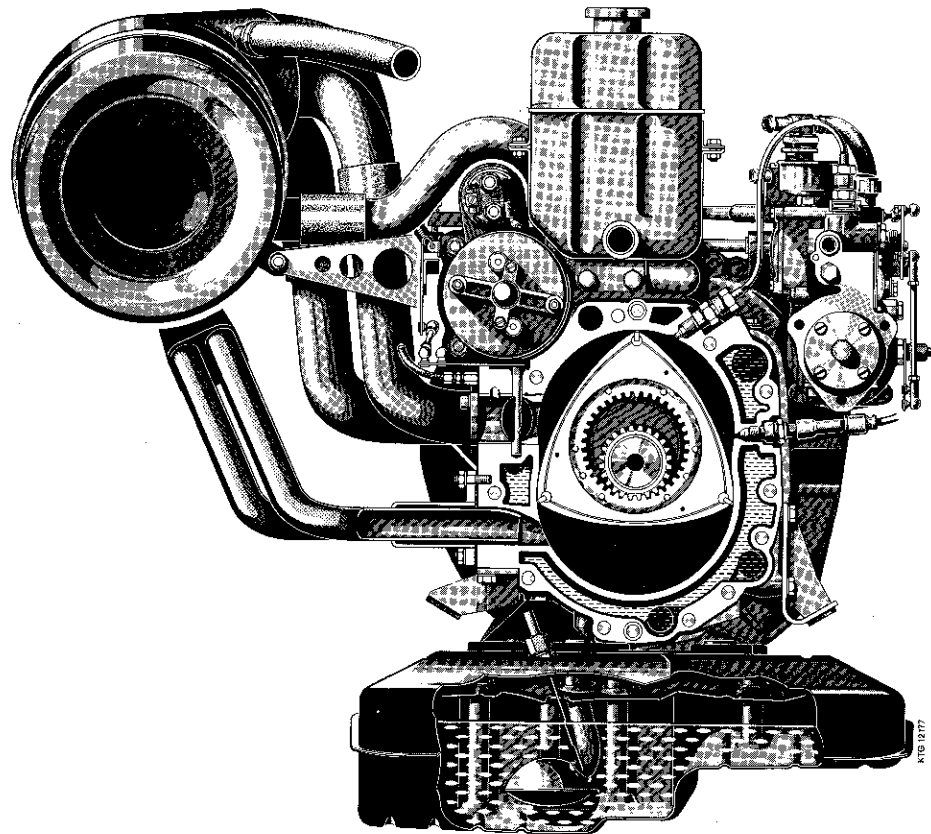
Sectional drawing of Daimler-Benz 4 rotor M 950 engine as used in the G 111 motor
